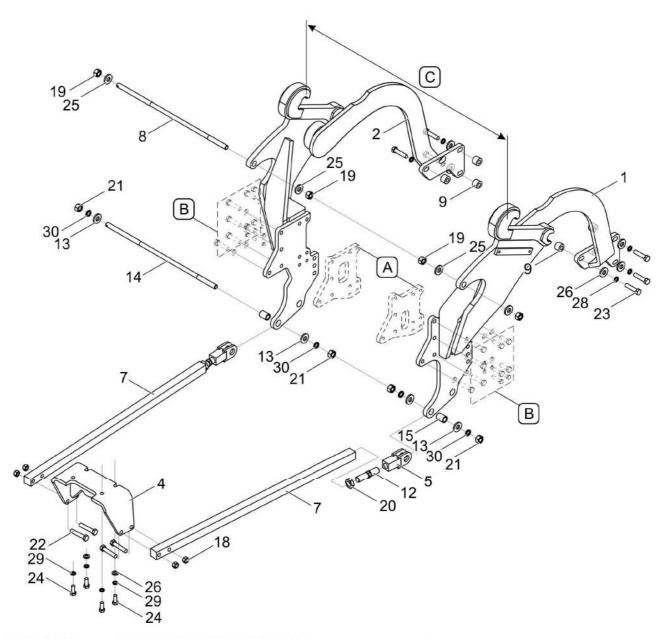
A Mounting bearing frame on Pronar 5115/5135 tractors
